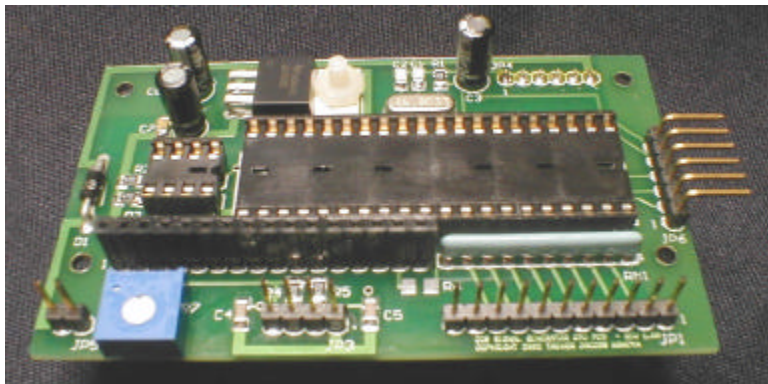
Top view of CPU board after sockets and connectors have been installed. (R6 still missing - an error)
